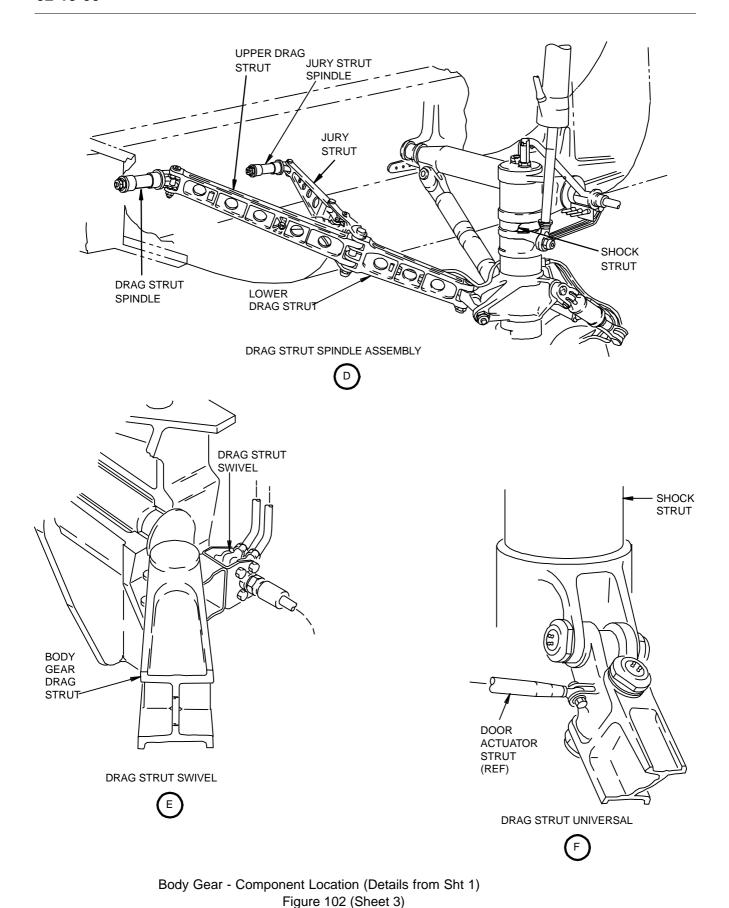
32-13 Body Gear Comp. Location Fig. 102 (Sheet 3)
